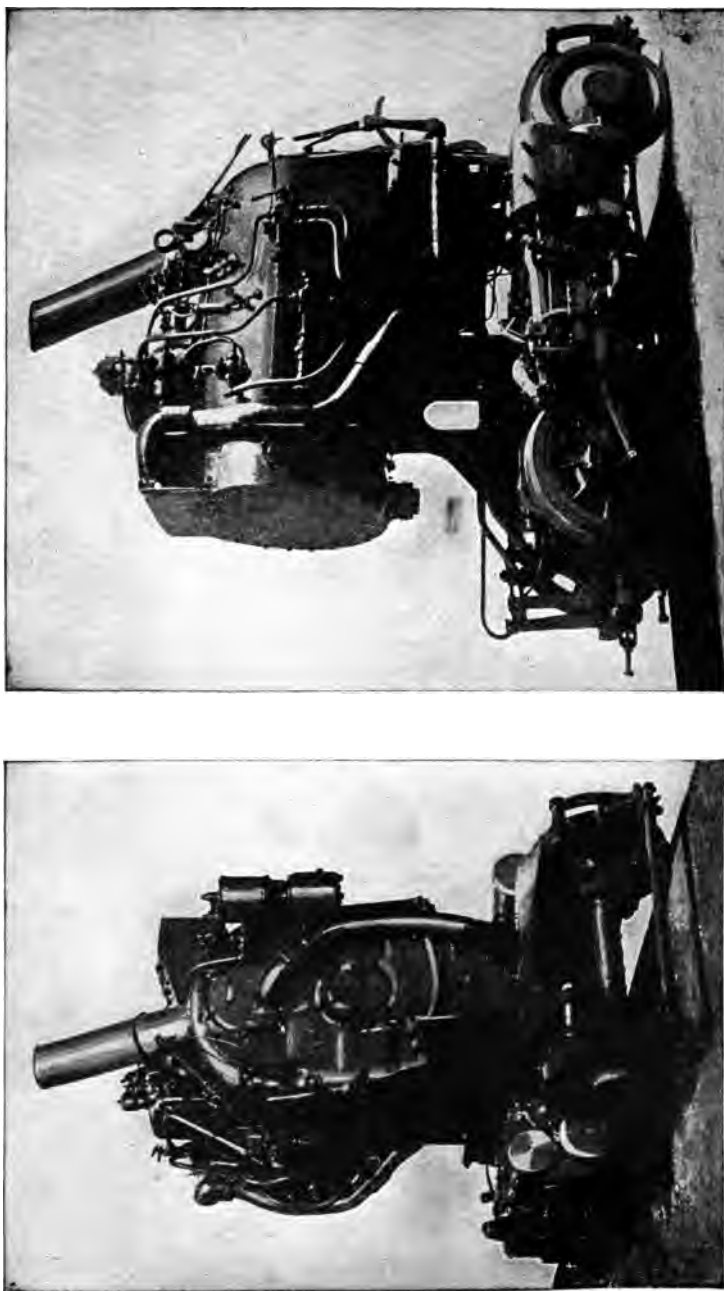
Front and Side Views of Engine Used in Rock Island Car
